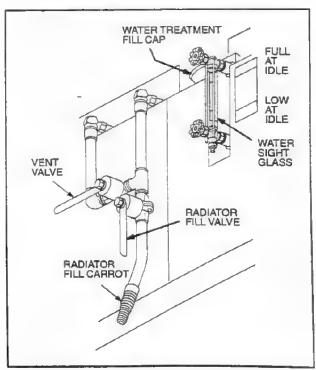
ENGINE COOLING WATER SIGHT GLASS AND FILL. E-41064A.
